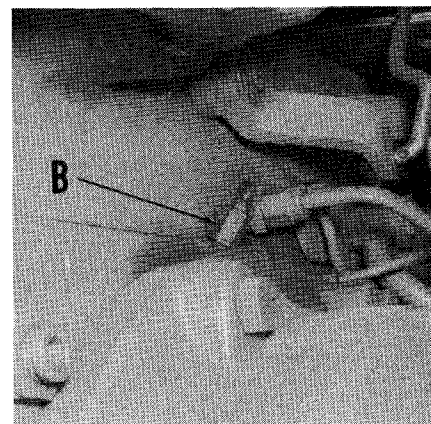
Brake bleeder fittings (B) are located at each side of rear axle center housing just above axle housing flange.
